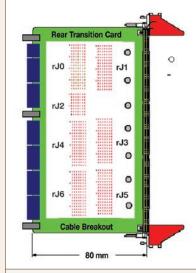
| A Universal VPX RTM board can have open connections out the back for directly wiring any pin.
